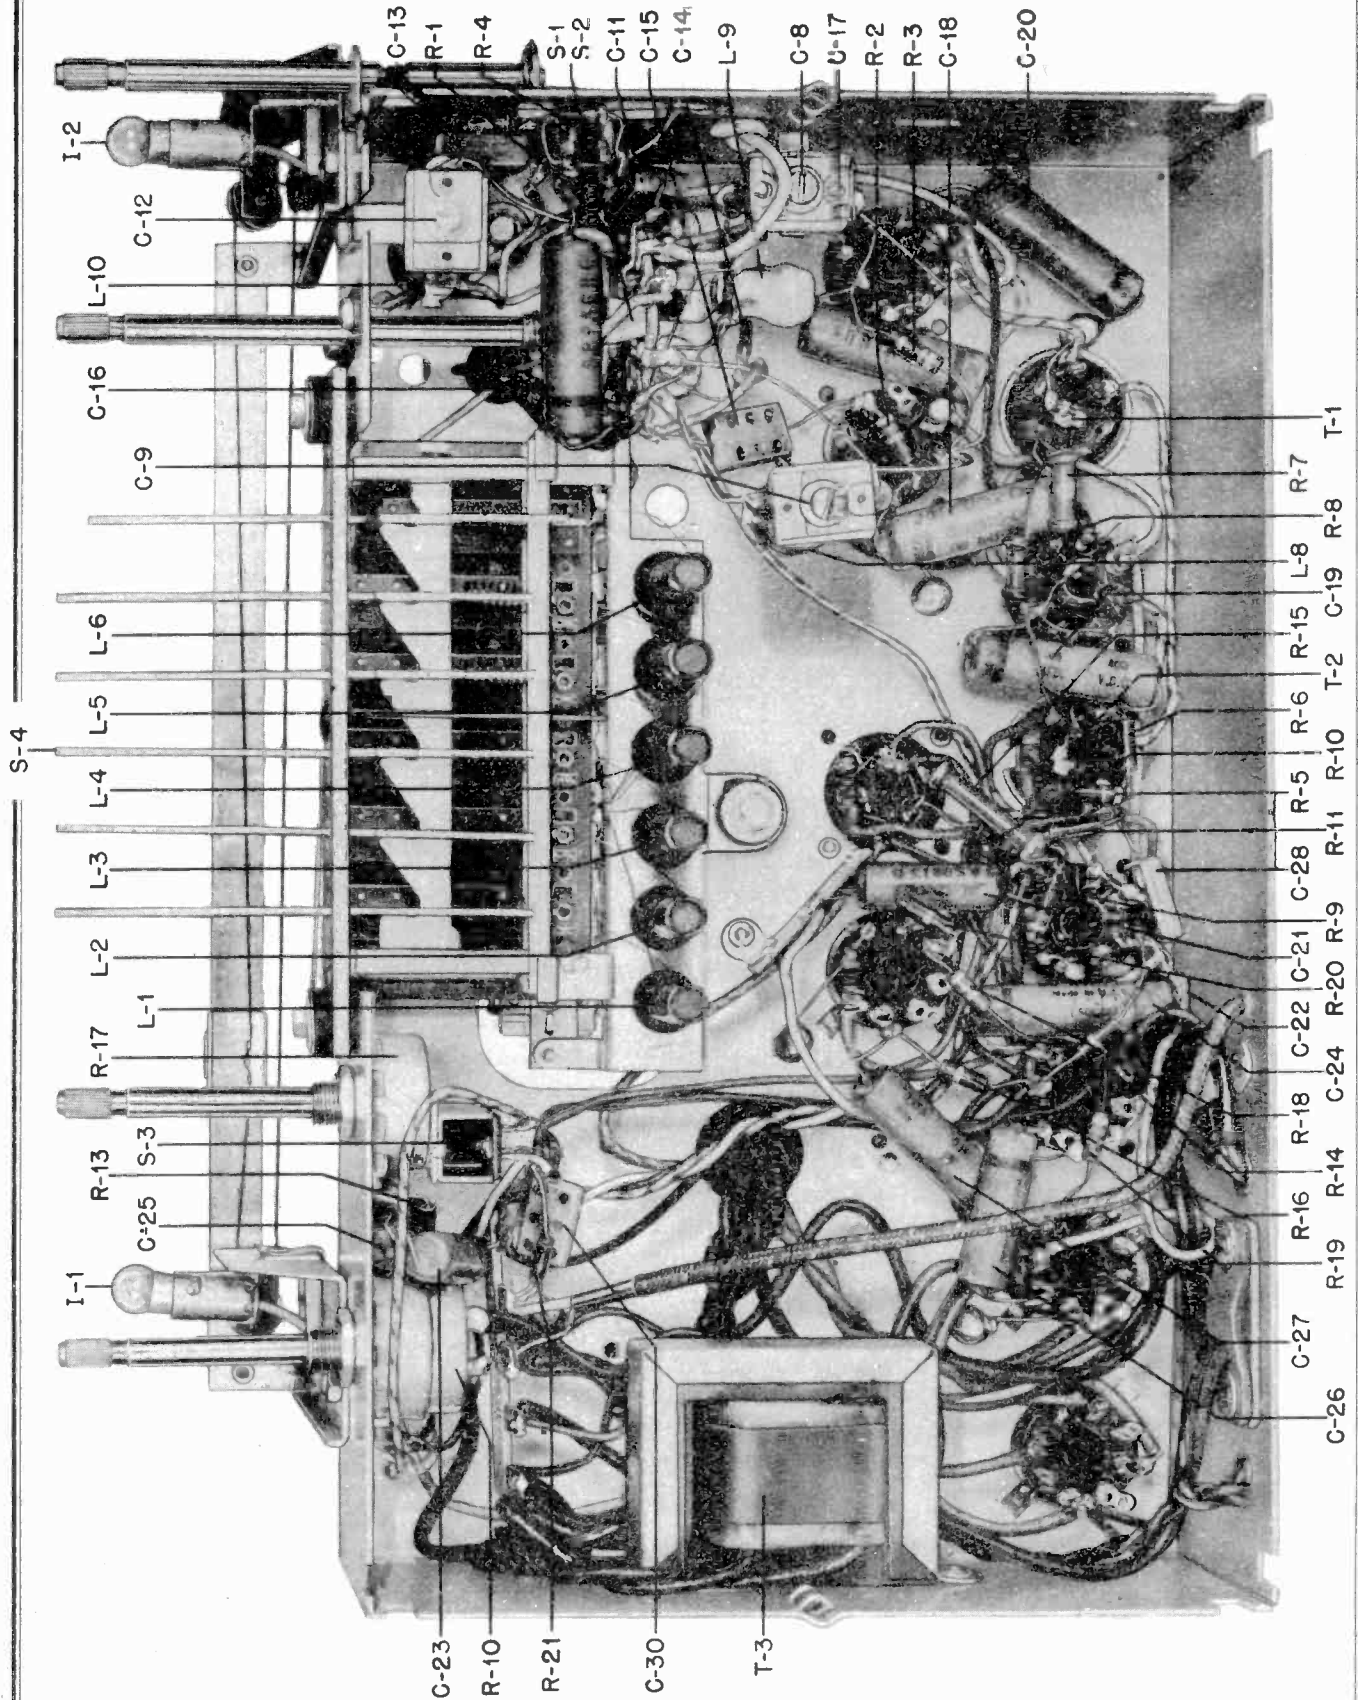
PARTS LOCATION, BOTTOM VIEW
